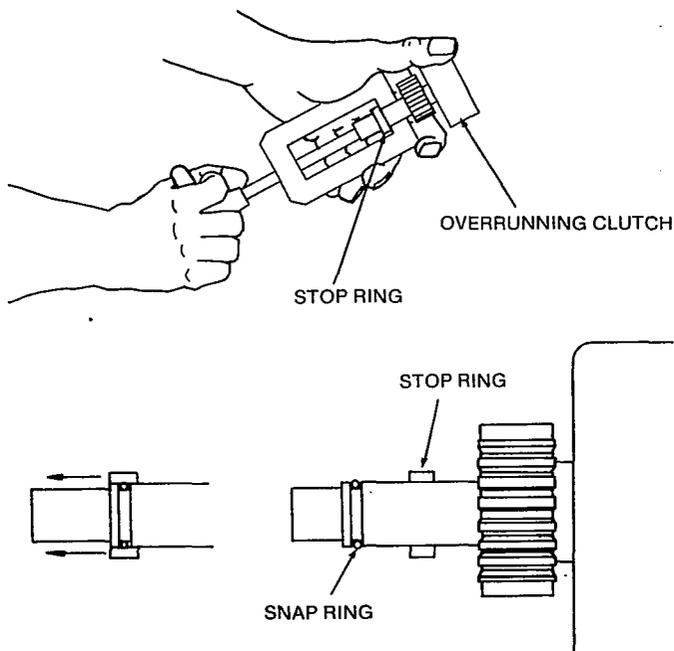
ADJUSTING PINION SHAFT END PLAY
